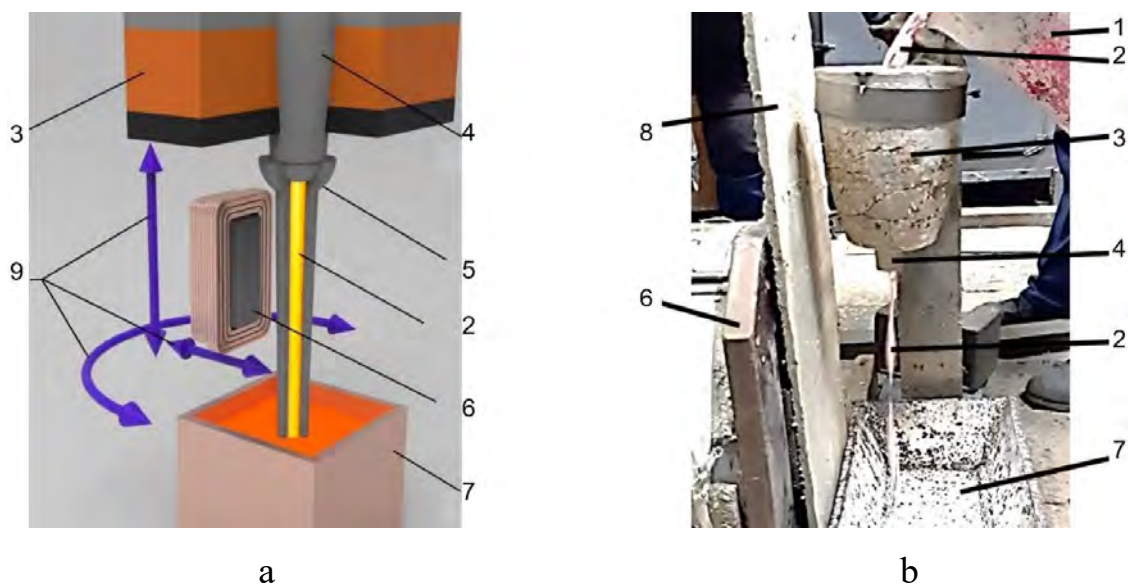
Layout of the electromagnet (a) and experimental equipment (b) to influence the molten metal jet: 1 – ladle; 2 – molten steel; 3 – tundish; 4 – metering nozzle; 5 – SEN; 6 – electromagnet; 7 – mold; 8 – protective shield of fire-proof cardboard; 9 – possible directions of electromagnet movement
